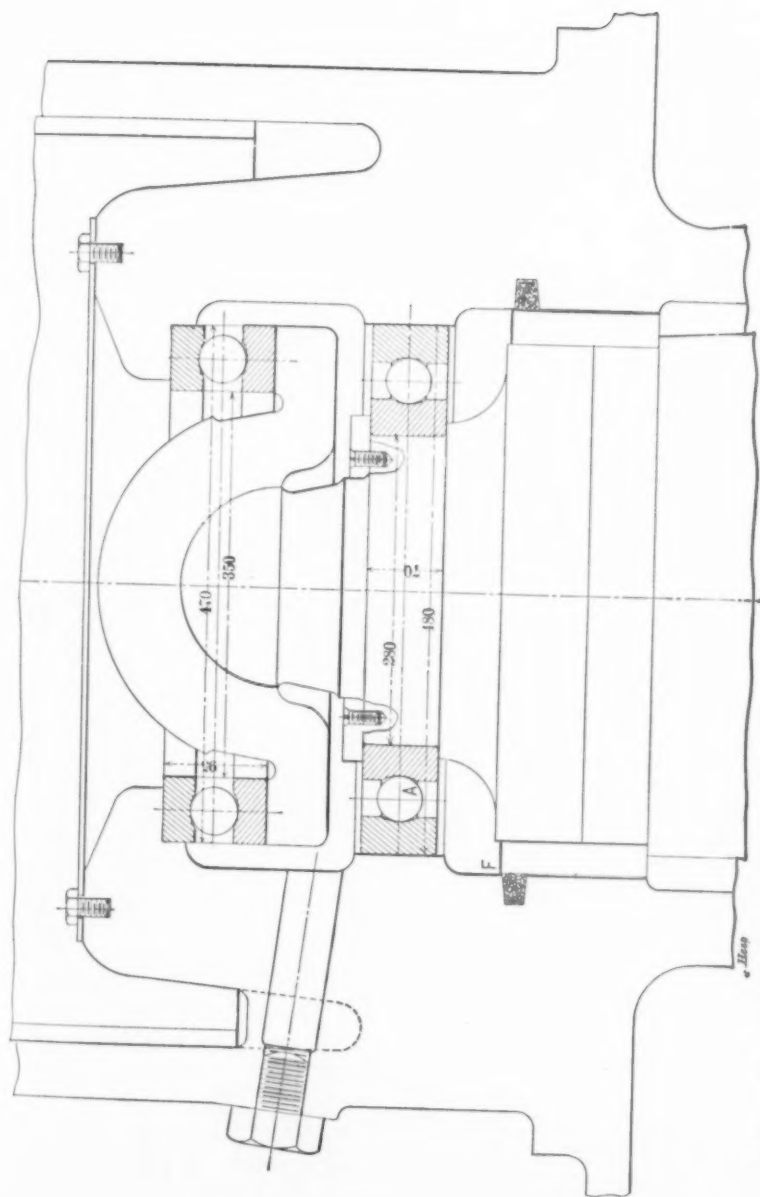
PILLAR CRANE. 39,000 LBS. VERTICAL AND 21,000 LBS. HORIZONTAL THRUST ON THE BALL BEARINGS.
